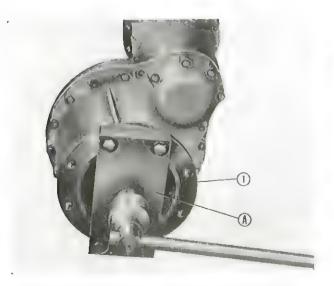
Withdrawal of the drive wheel shaft hub.
